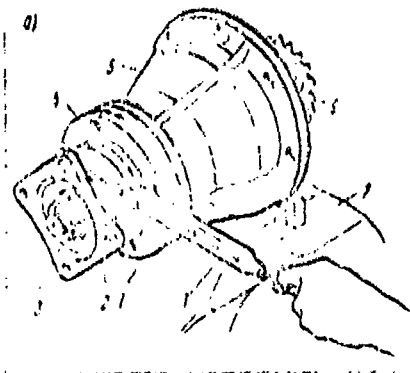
Checking tightness of the bearings on the bevel pinion gear shaft:
